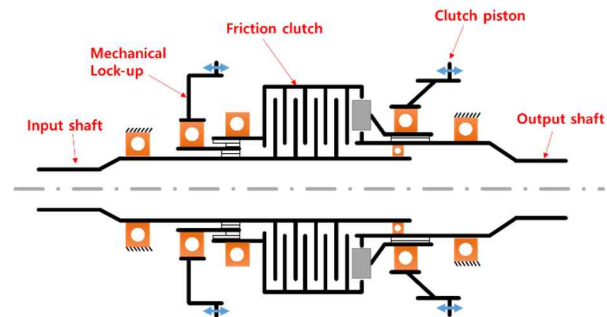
Wet multi-plate clutch with mechanical lock-up (Type 2)
